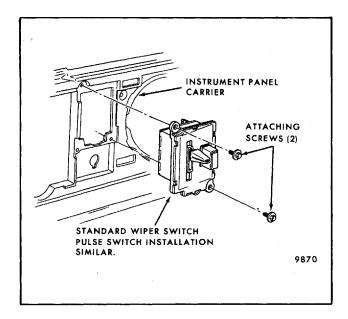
Windshield Wiper Switch Installation - Buick B, C Styles - Standard Switch Shown, Pulse Switch Similar
